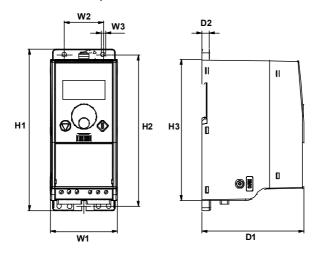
SmartDrive Compact dimensions, MI1-MI3
